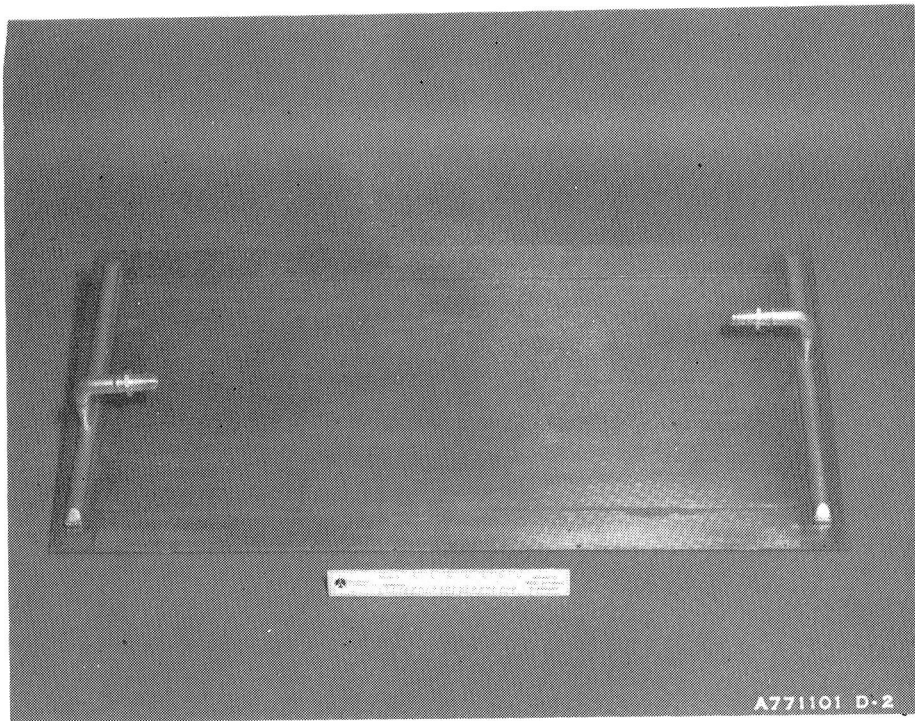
TA Panel with Manifold Caps Welded In Place
